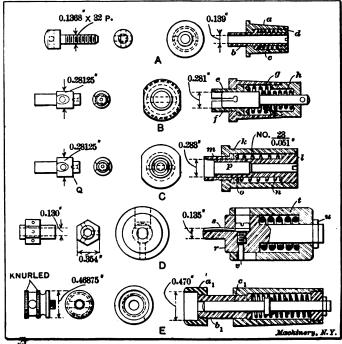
Representative Types of Transferring Bushings and the Work they were designed to hold
